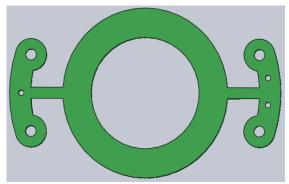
Changed shape of stator board. Stator will be placed on the large circle at the center. Four larger holes on the side are for #4-40 screws, and three smaller holes are for wires from the stator.
